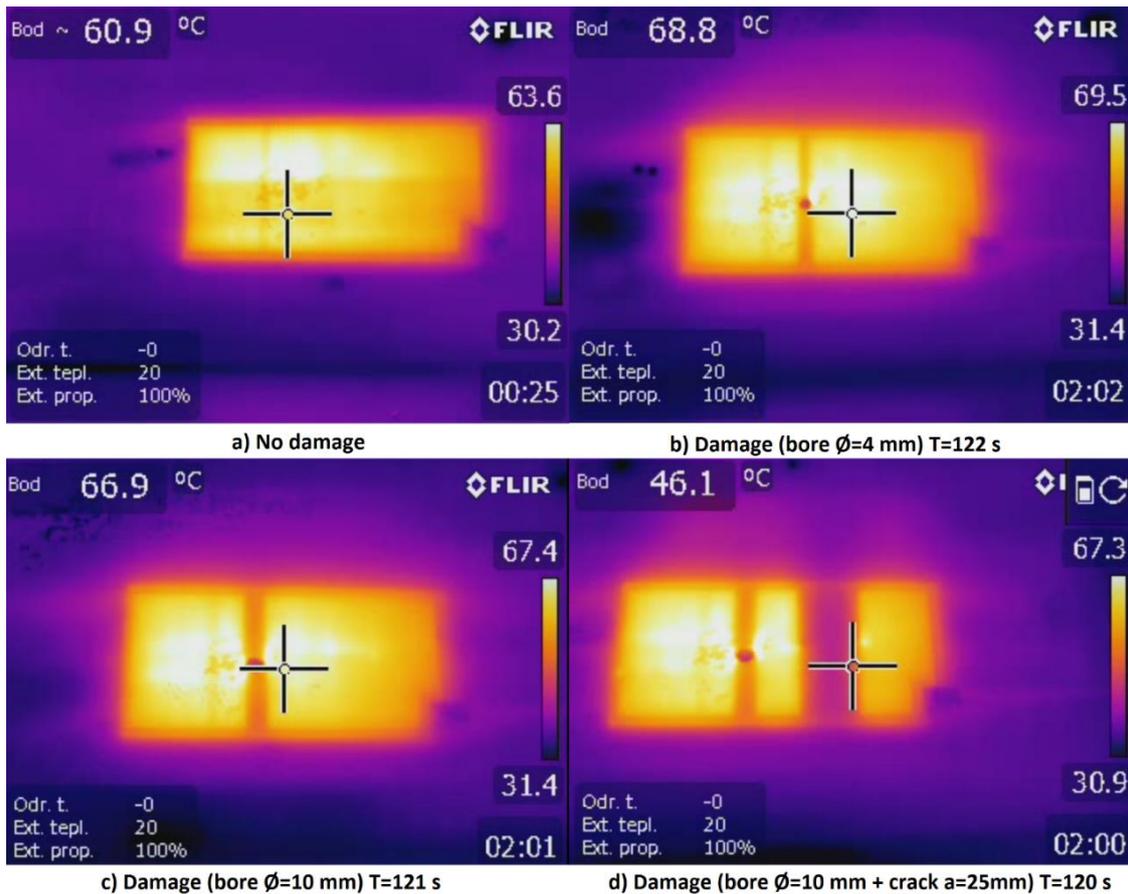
Thermograms of a testing specimen a) without damage; b) bore diameter 4 mm; c) bore diameter 10 mm; d) bore diameter 10 mm, crack size a = 25 mm
